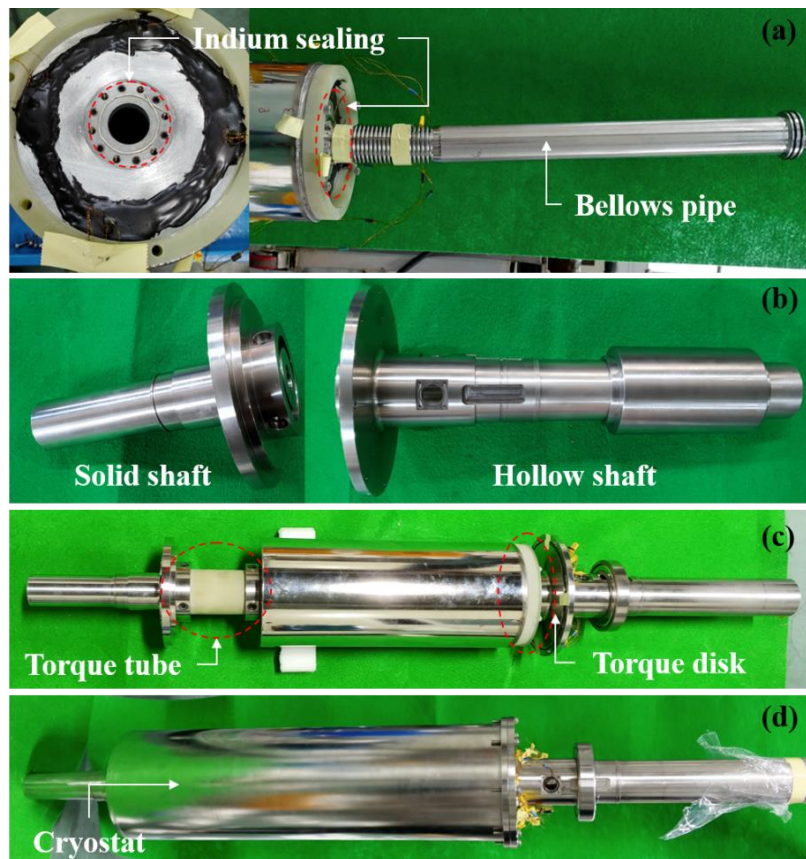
Images of HTS rotor assembly II. (a) Sealing of bellows pipe by indium wire, (b) both rotating shafts, (c) connection of shafts and torque elements, and (d) final rotor assembly with cryostat
